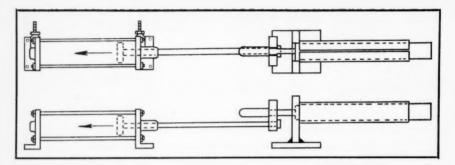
Sketch showing how double-action air cylinder can be used in removing forming mandrel from completed spacer tube
